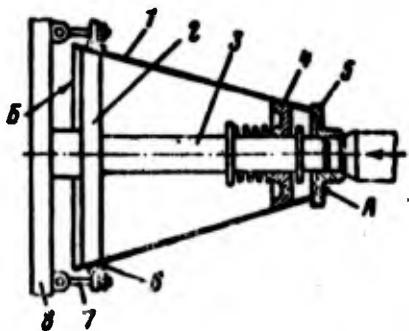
Diagram of the fitting for facing of thin-walled cone parts. 1 - machinable part; 2 - fixed cone disk; 3 - axis; 4 - mobile disk; 5 - clamp; 6 - lathe dog; 7 - folding bolt; 8 - face plate.
